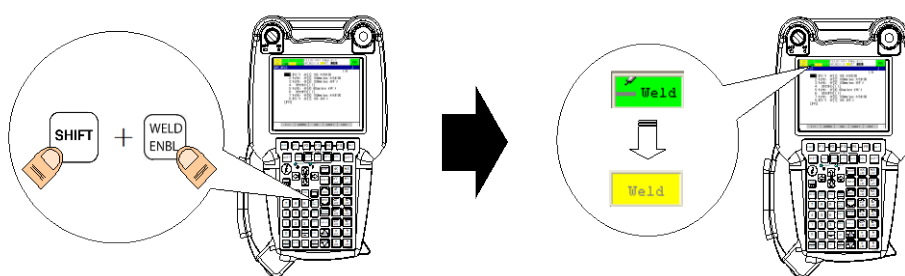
(f) Switch to Weld Disabled
